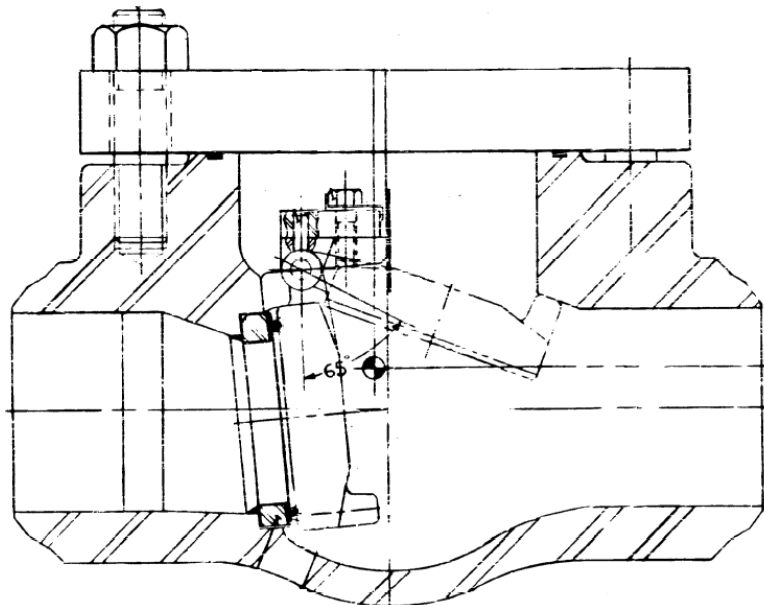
Group 70-1 Unit 1 Valve [9.c]
